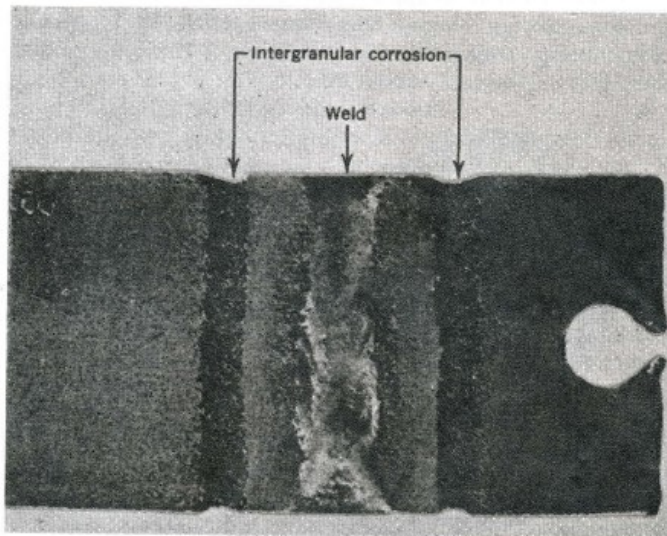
Illustrative diagram showing weld decay in a stainless steel. Regions along which the grooves have formed were sensitised as the weld cooled [42].
